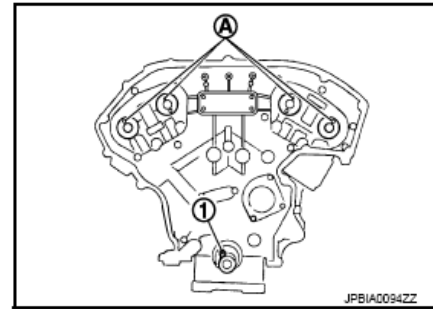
Identifying Crankshaft Key And Dowel Pins
